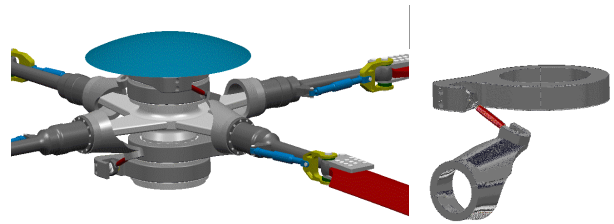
Electrical direct drive ring motors integrated into Lynx-type hingeless rotor
